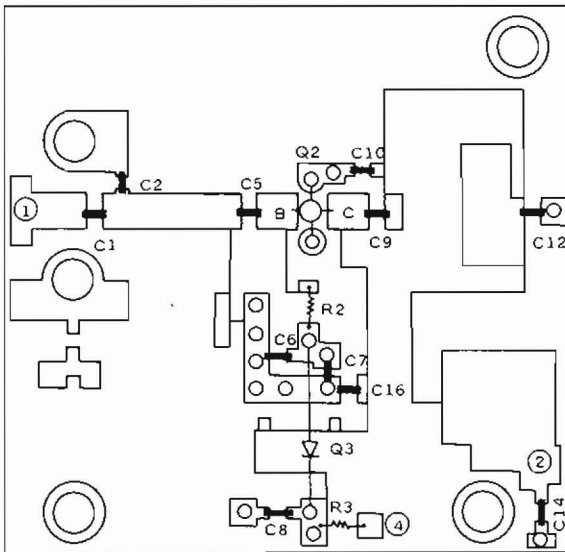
Z6-Z3 IF AMP Parts Layout
